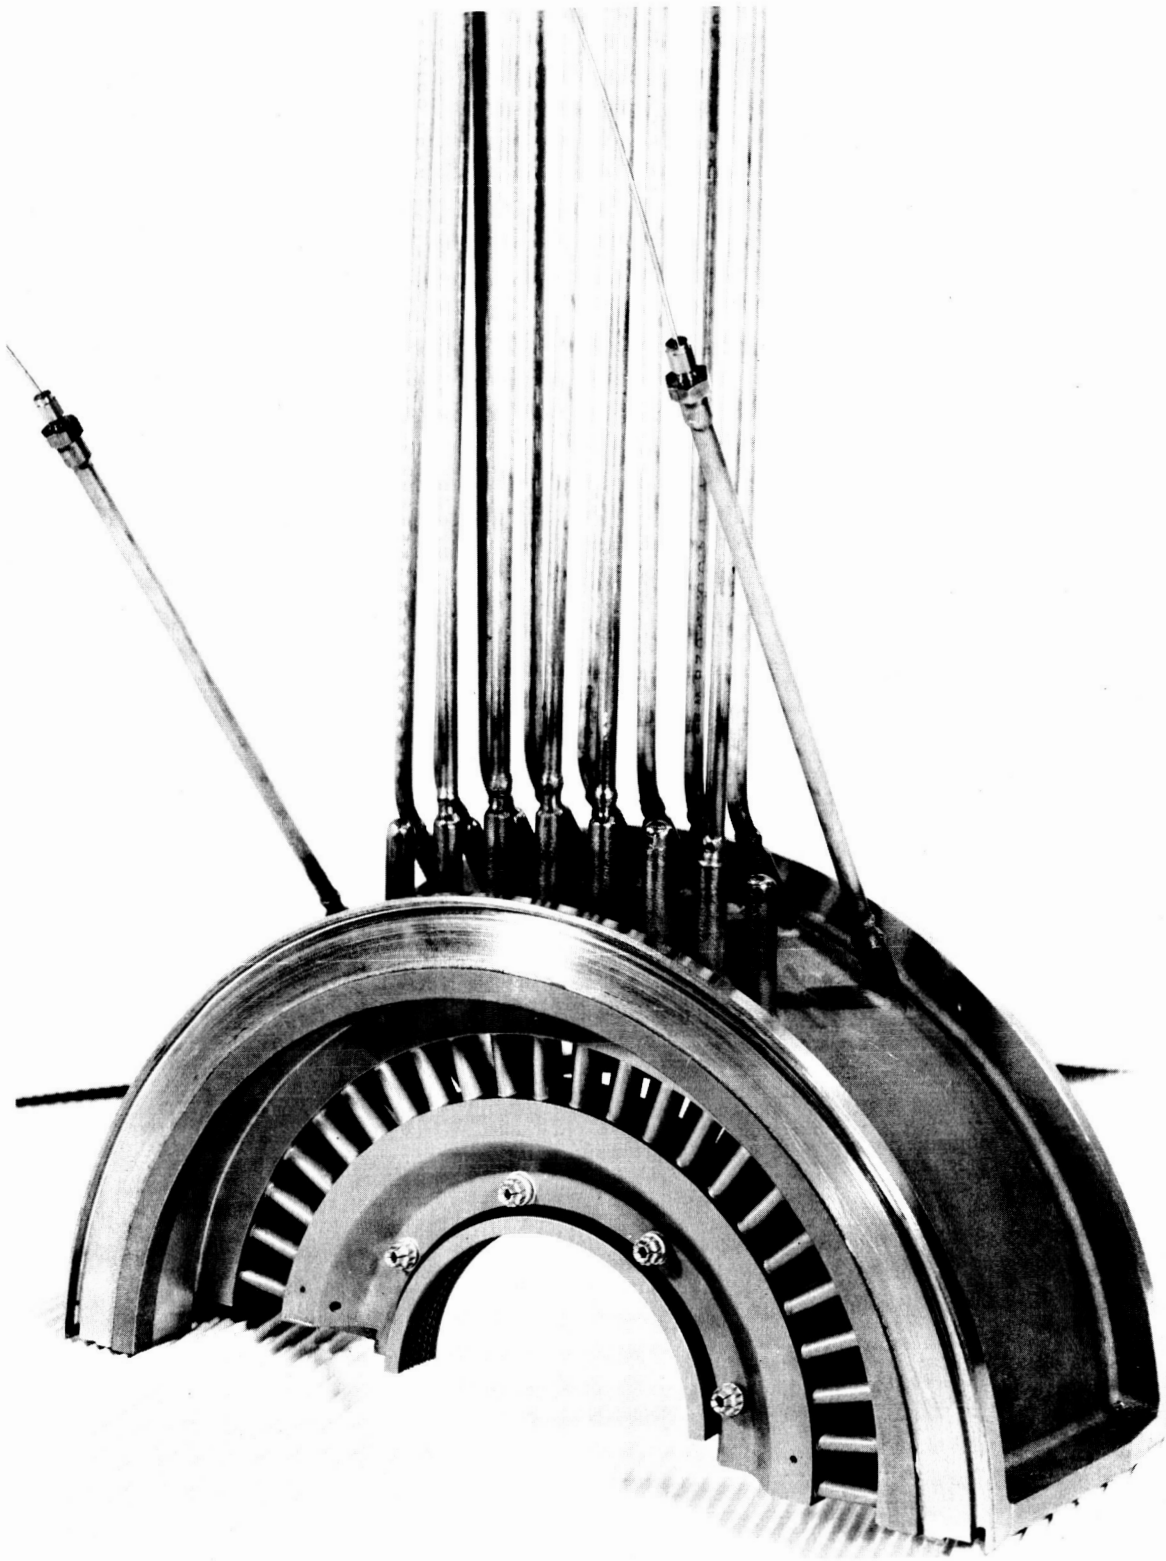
Casing Assembly with Welded Pressure Taps.
